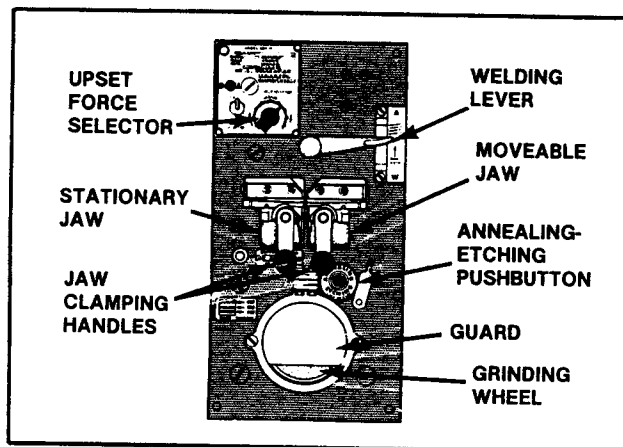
DBW-15 BUTT WELDER & GRINDER.
